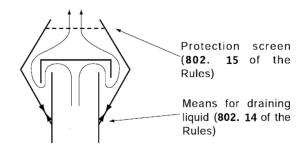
Example of Construction of Vent Discharge Outlet
